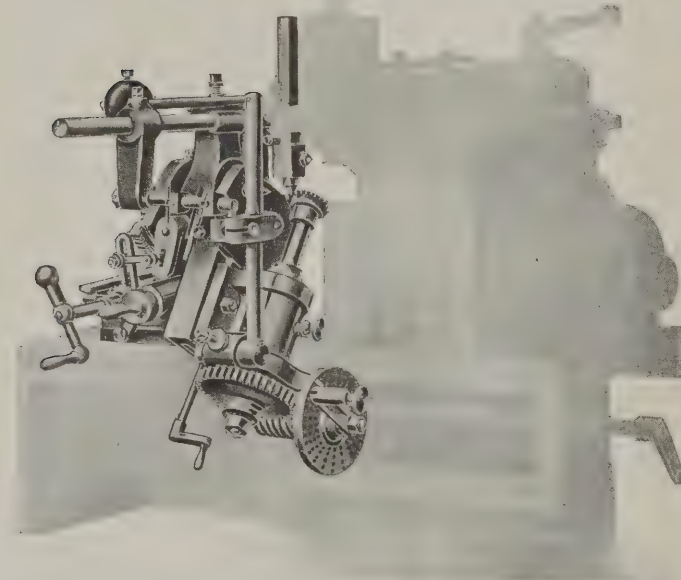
Attachment for Finishing Bevel Gear Teeth in the Shaper by the Templet Process.
